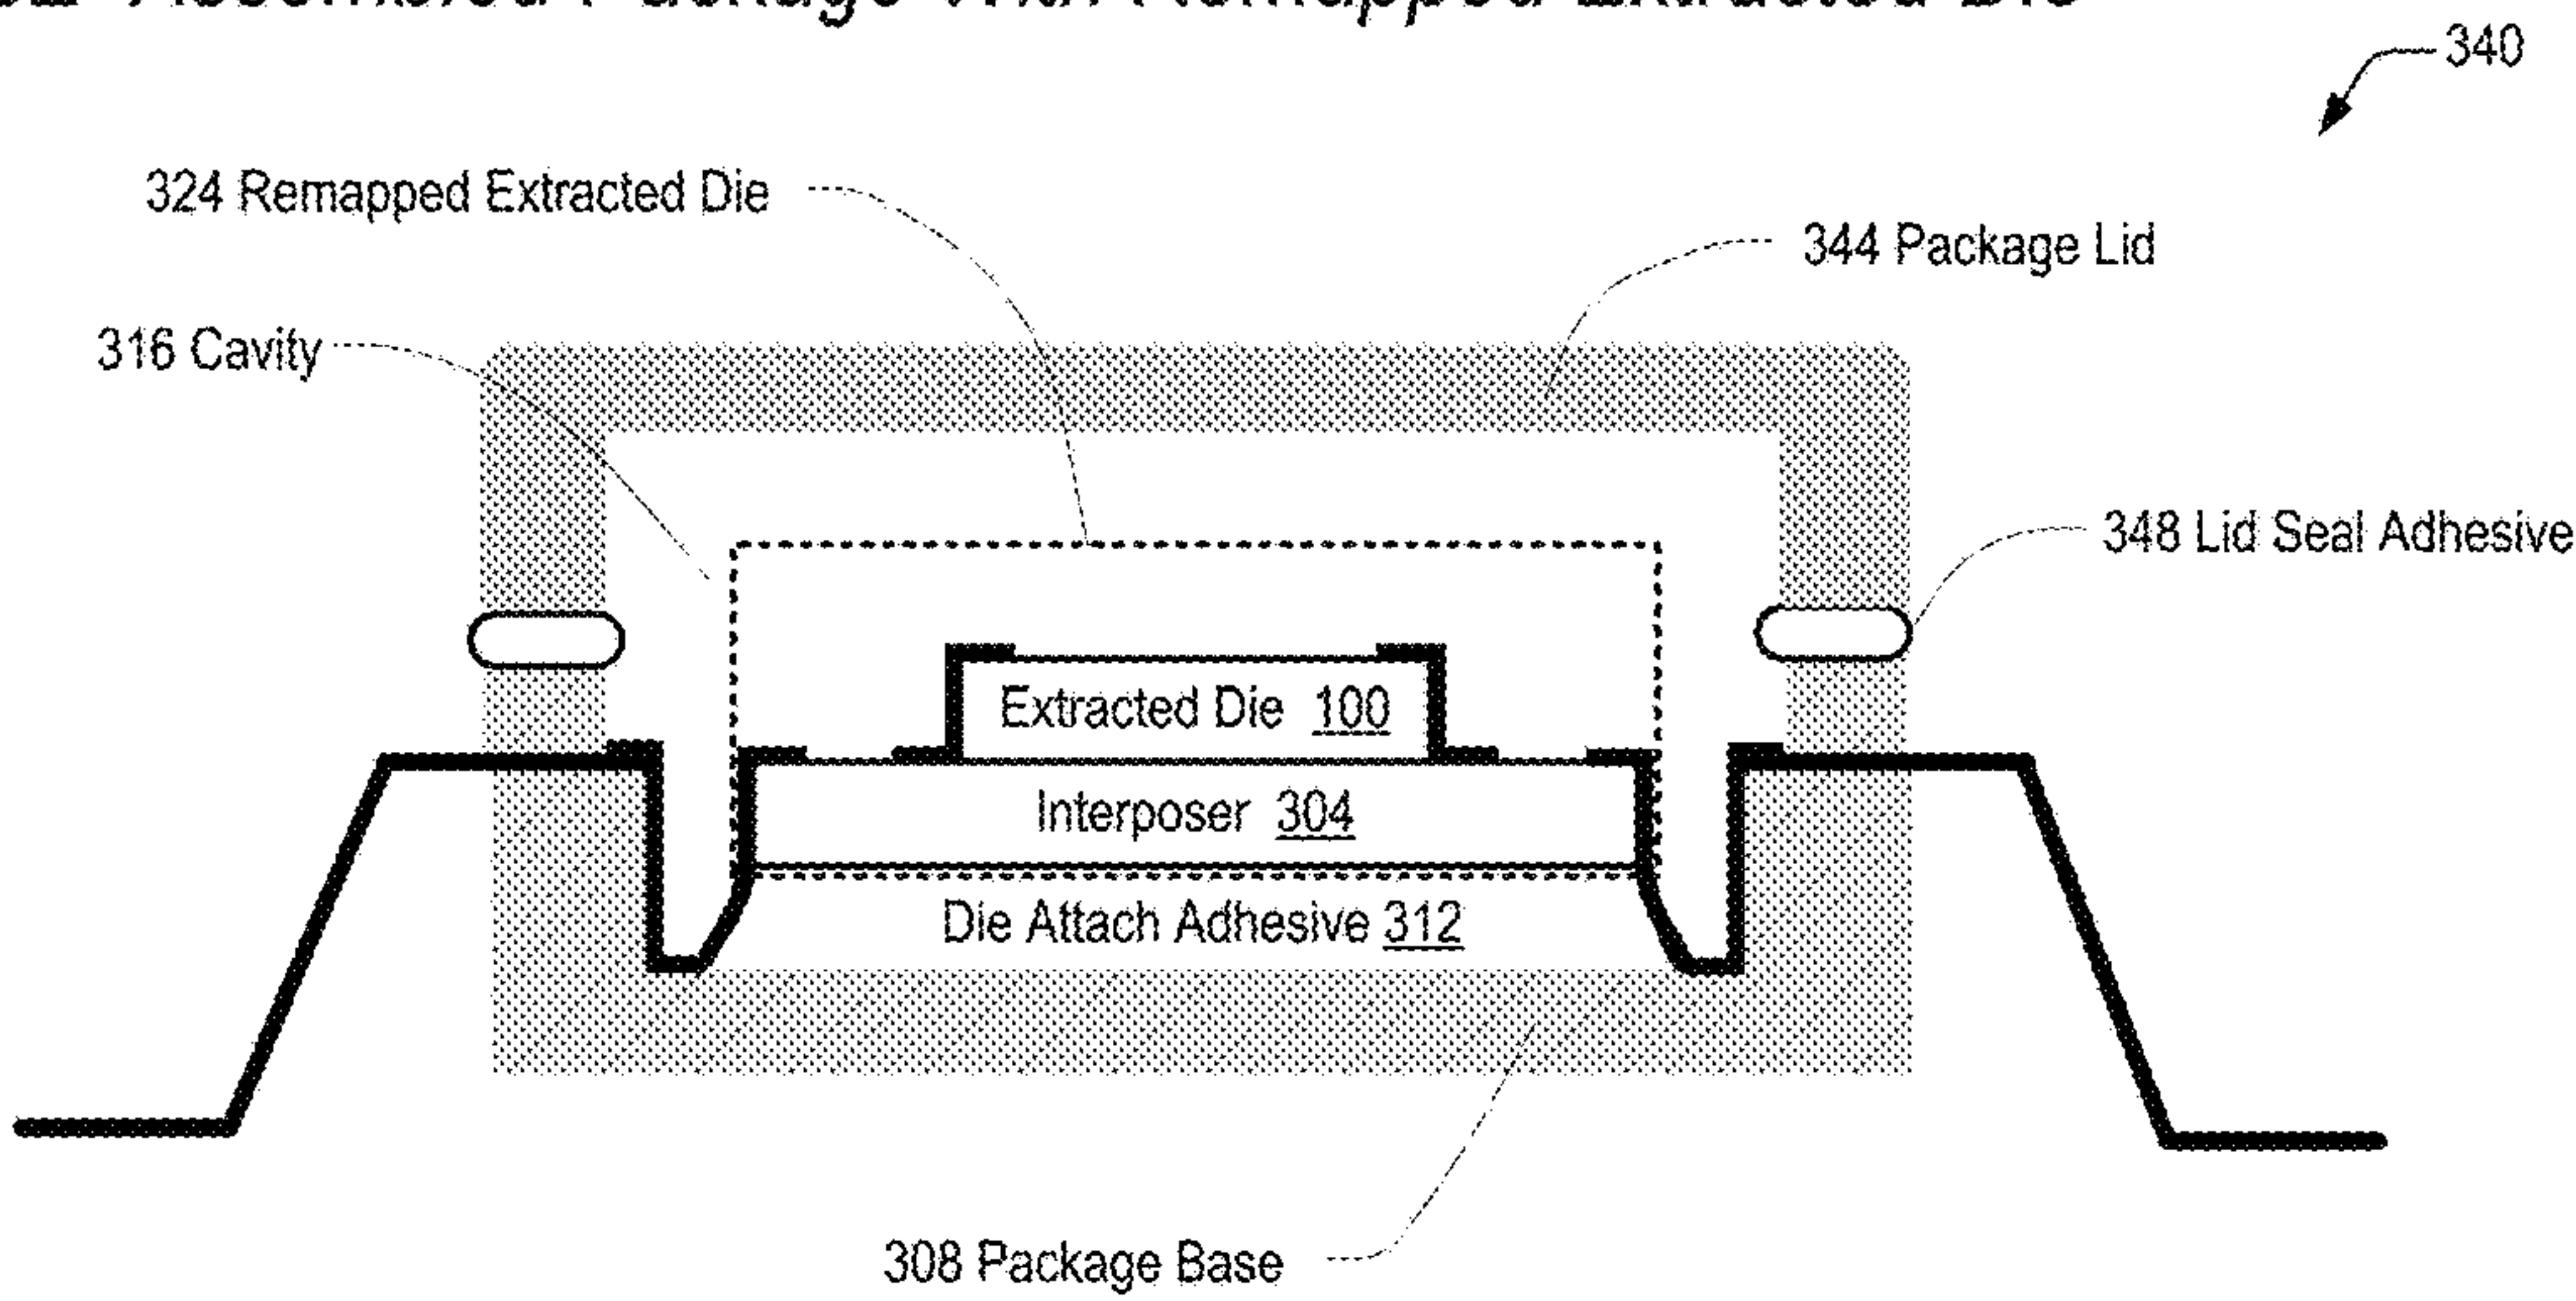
F Assembled Hermetic Package With Remapped Extracted Die
